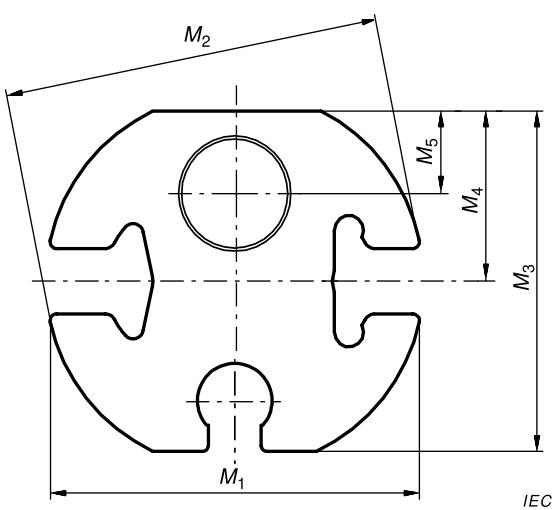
Dimensions of gauges for ball coupling size 16N and 18N
